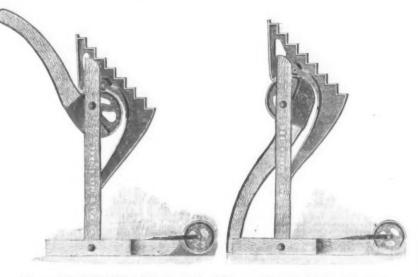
Universal Lifting Jack, Lowered. Fig. 2.—Universal Lifting Jack, Raised.
